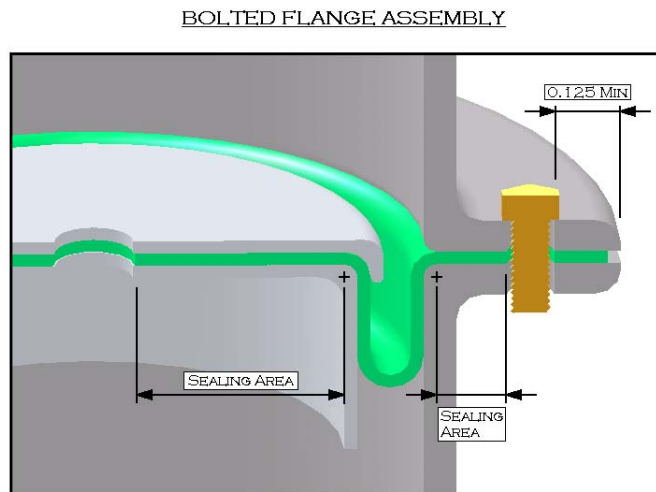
Clamp Area for Bolted Pistons and Flanges
